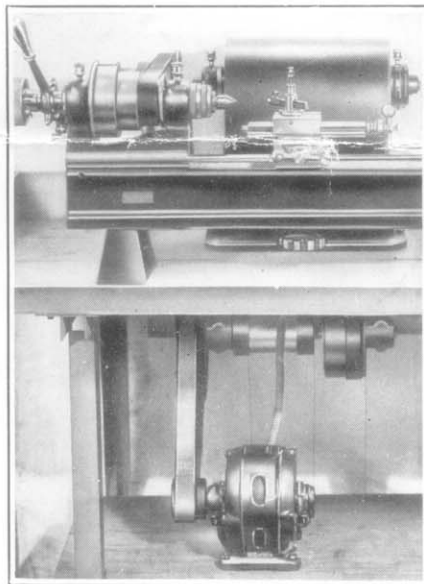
Rivett Series 505 lathe on bench with Horizontal Safety Drive Countershaft and Jackshaft
